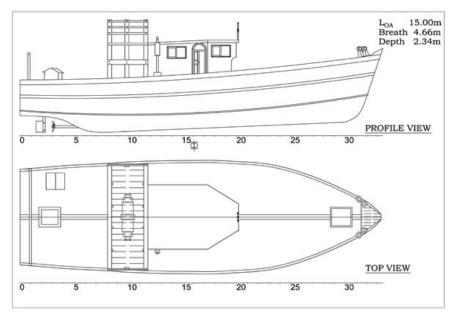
Profile and deck layout of a typical gillnetter from Odisha
